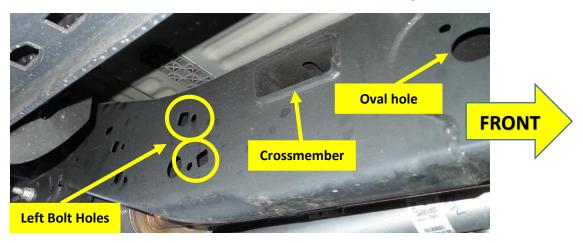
Passenger Frame Rail Hole Locations, under rear door
